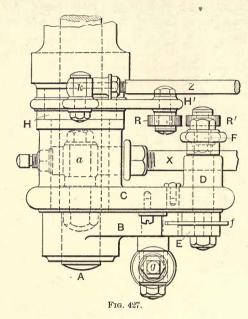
, 426, and 427 are details of the releasing mechanism of the same engine.
